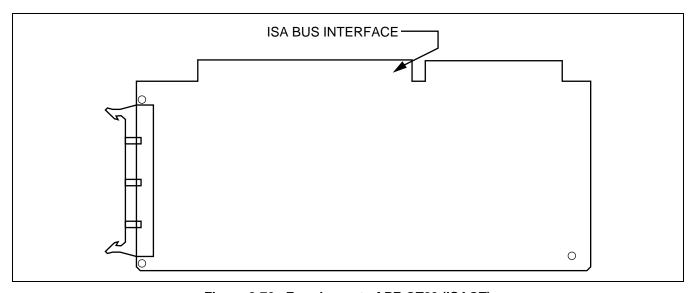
Face Layout of PZ-GT20 (ISAGT)
